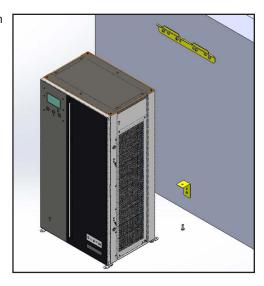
Charger, Wall, Wall-Mount Hanger, Bottom Bracket and Screw with an M5 thread
